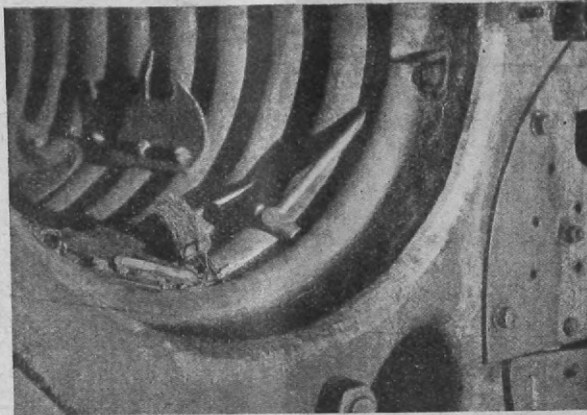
THE FINISHED WELD OF THE CRACK SHOWN IN FIG. 3.
